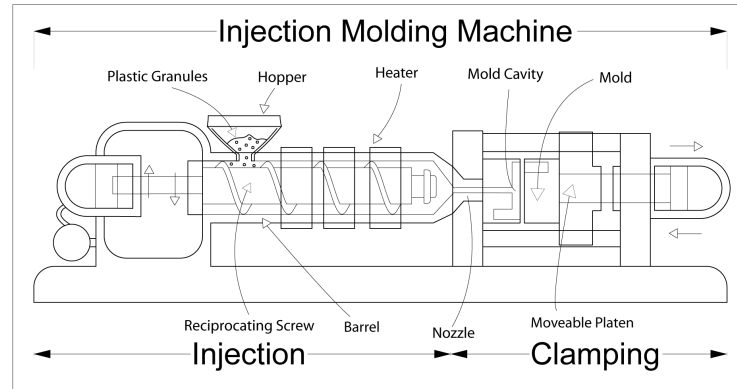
Moulding machine sketch. Figure from Wikimedia Commons.
